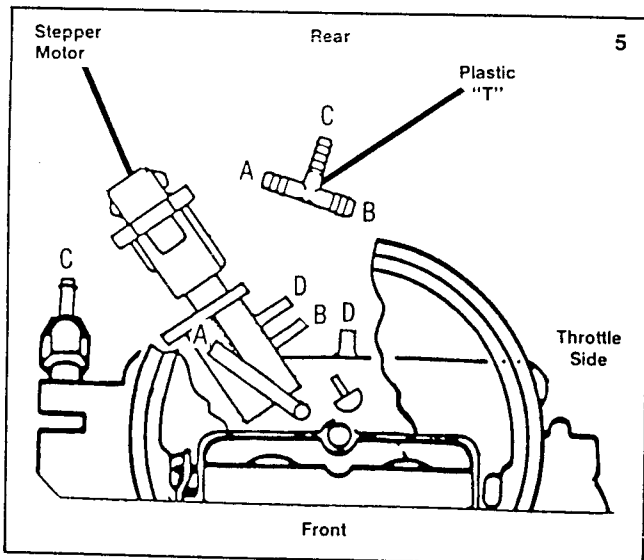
above also shows the routing of the vacuum hose. Install stepper motor and vacuum hose from choke tube to the plastic "Tee." If a new stepper motor is required, purchase Holley P/N 46-145.
